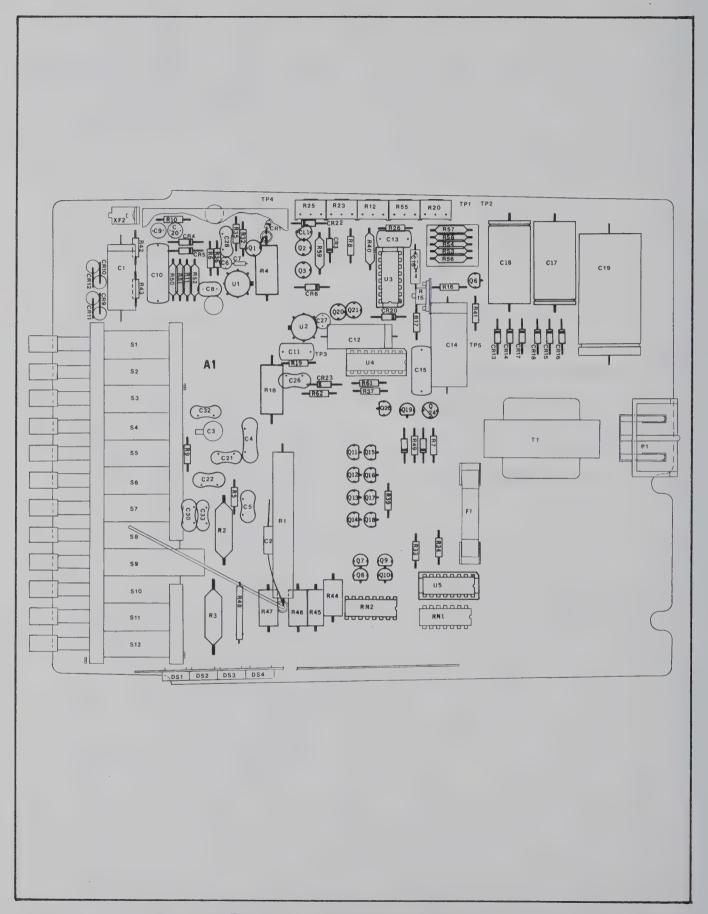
8000A MAIN PCB ASSEMBLY
